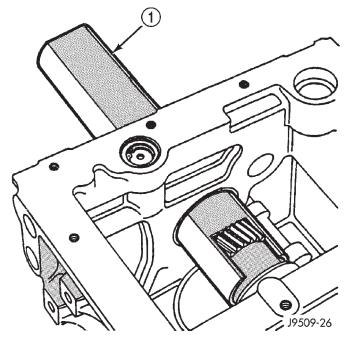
Crankshaft Special Tool VM.1004 1 - TOOL
